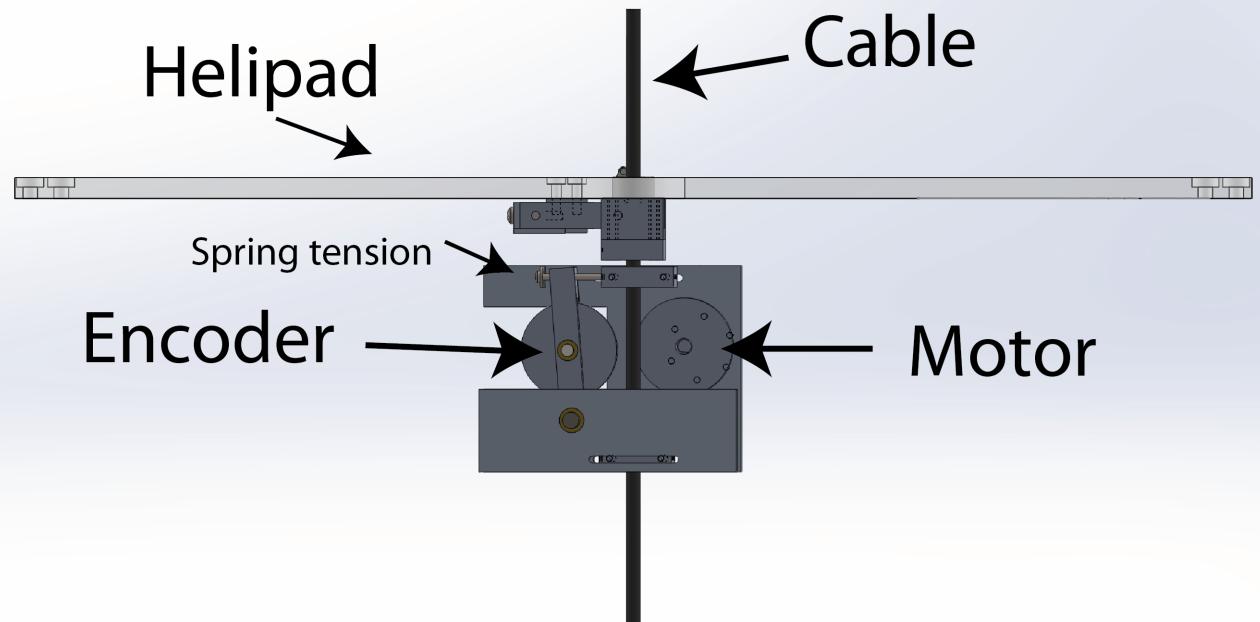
The Simple Winch only has one motor and an encoder wheel pushing the cable towards the motor wheel. Two springs adjust the tension.
